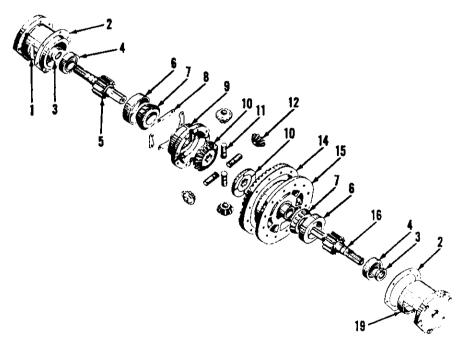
Exploded view of differential, bull pinion shafts and associated parts. Shims (2) control carrier bearing preload and gear backlash adjustments.
